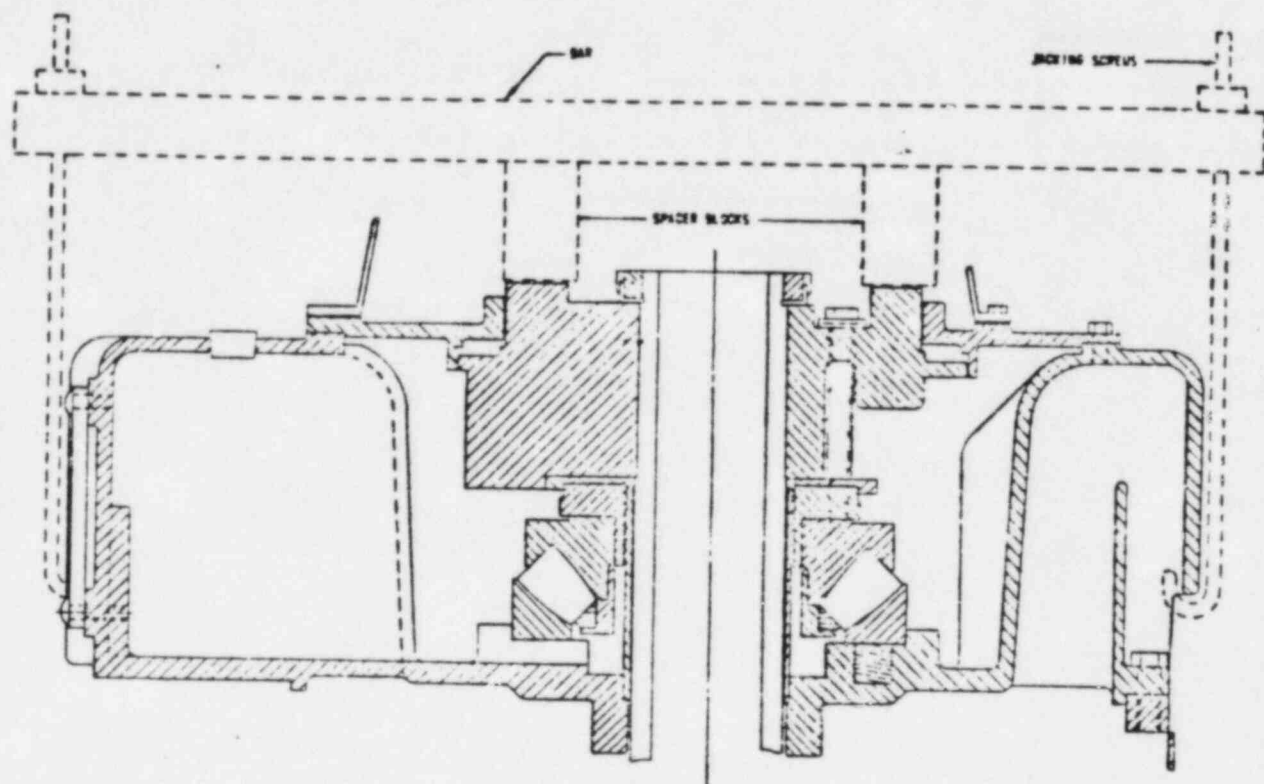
Upper end of typical high thrust hollow shaft with spherical roller bearings, showing assembly rig.
